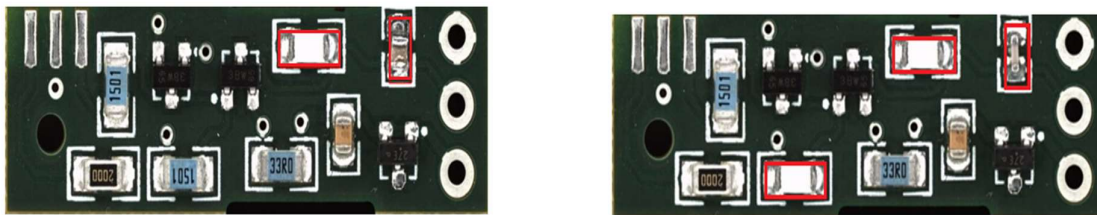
Component and solder joint defects localization in defective SMT assembled PCBs
